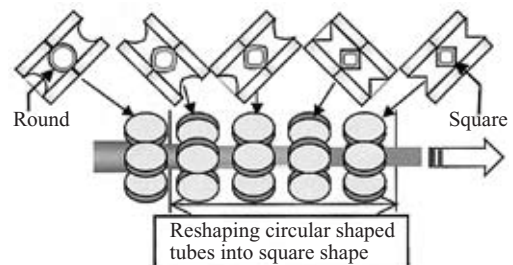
Schematic drawing of forming JFE Kakuhot using hot sizing mill
